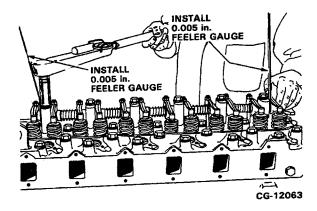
Install Feeler Gauges to Prevent Rocker Lever Binding
